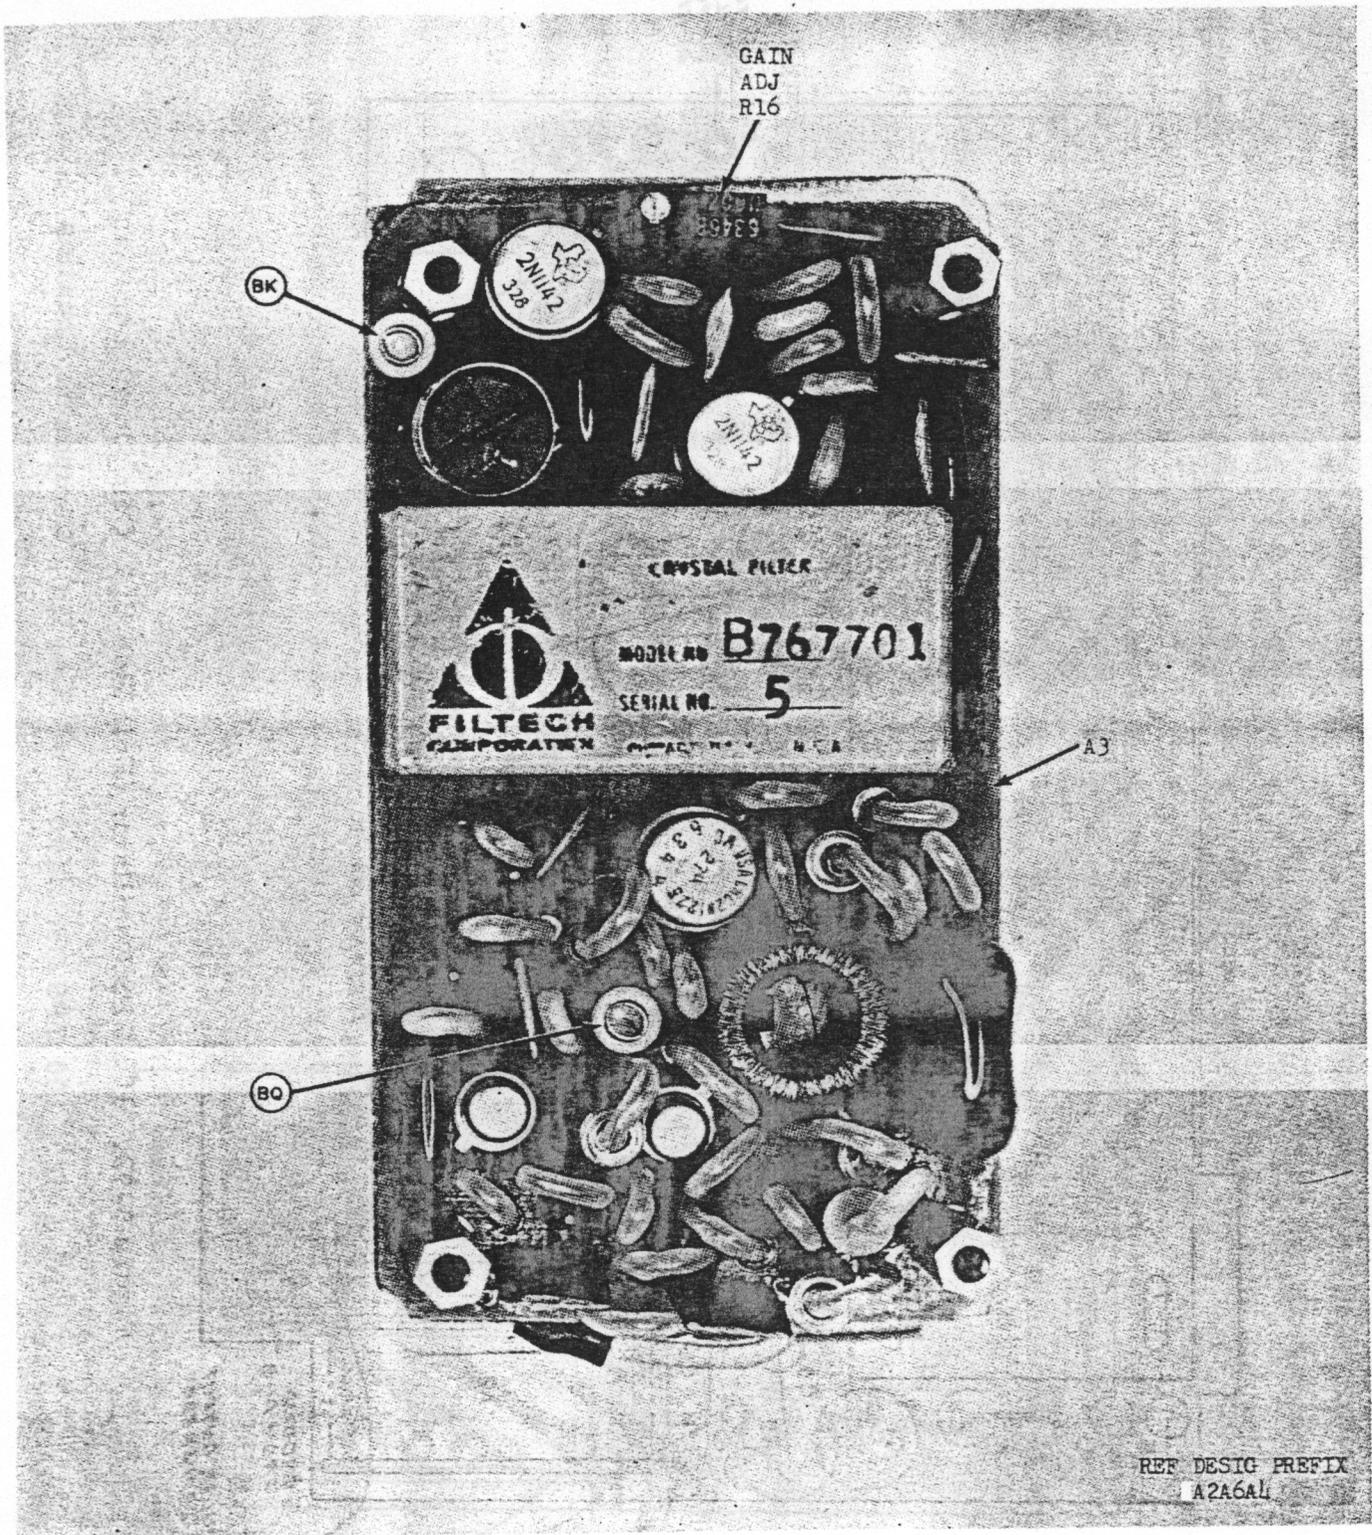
100 CPS Synthesizer Electronic Subassembly, Front View, Component and Test Point Location
